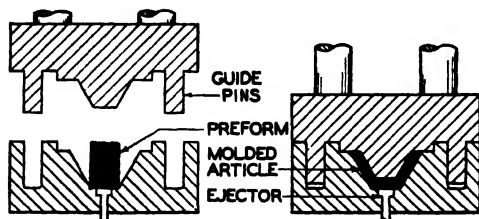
Sketch illustrating the principle of the vertical hydraulic compression press, for molding compounds containing thermosetting resins. A single-cavity press is shown.
